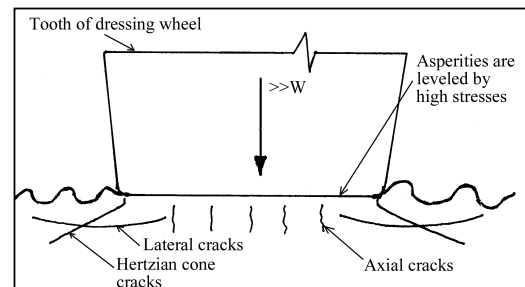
Wear mechanism beneath a dressing wheel - severe loading case
